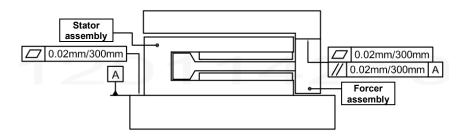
Ironless linear motor installation interface assembly precision
